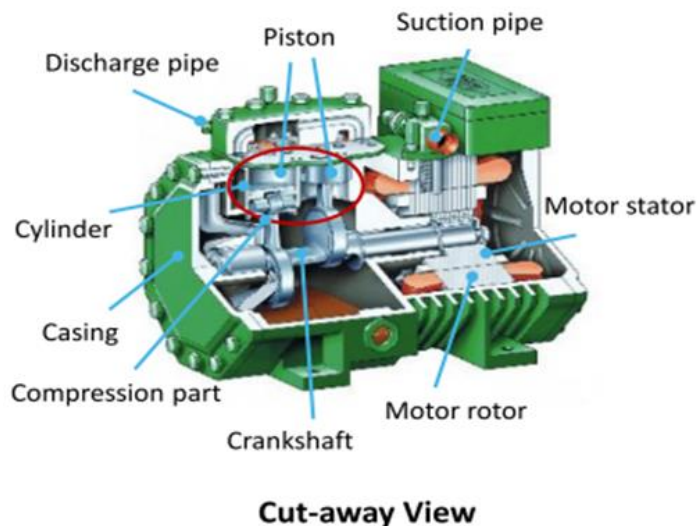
Cut-away view of a reciprocating compressor (Source:(Lin and Avelar,2017))
